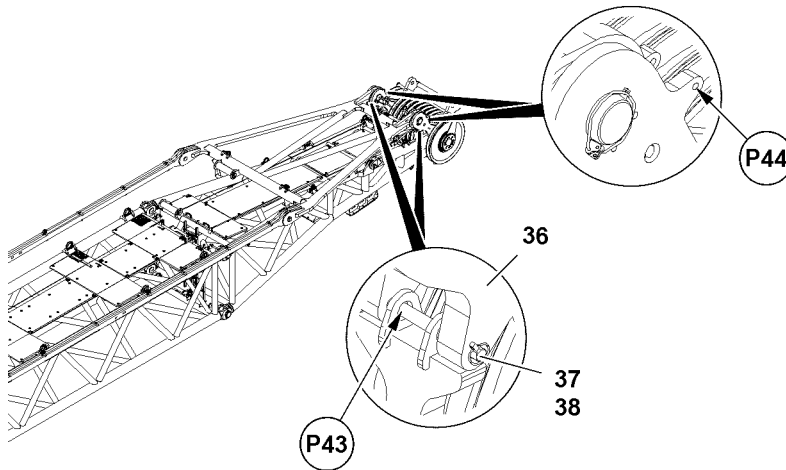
Disassembling WA-frame 2 on the end section — Unpinning the brackets
